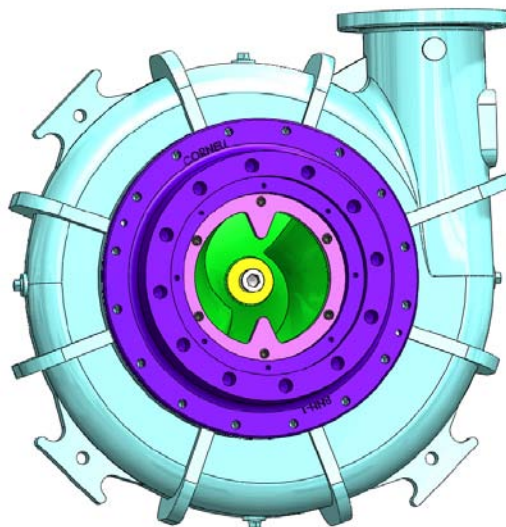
Installed Rotating Subassembly on Volute and Suction Cover
